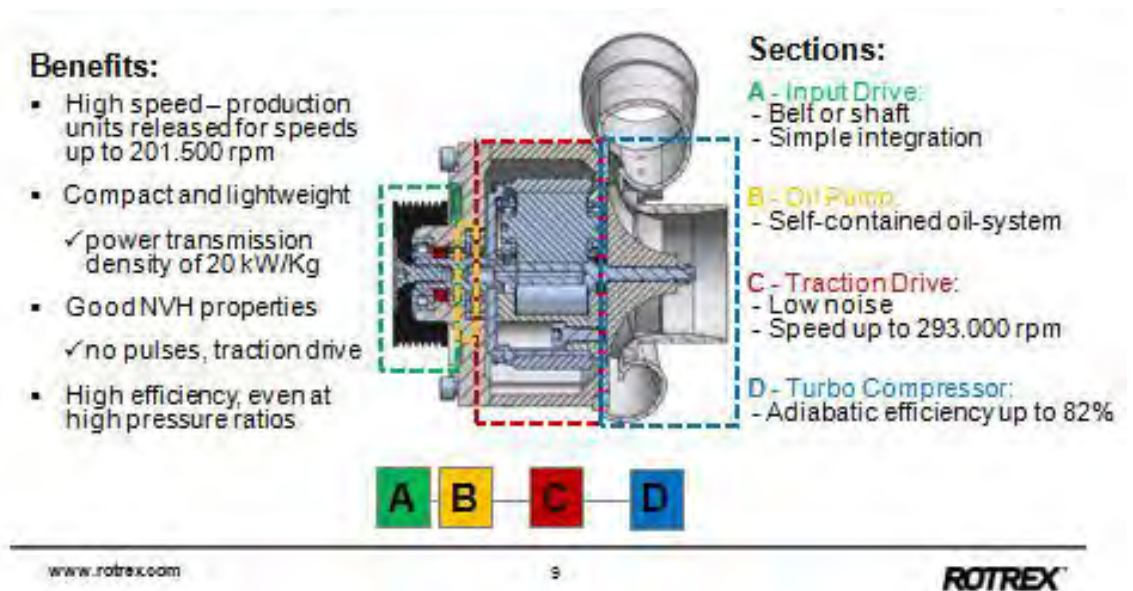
Main parts of the Rotrex compressor derived for steam compression
